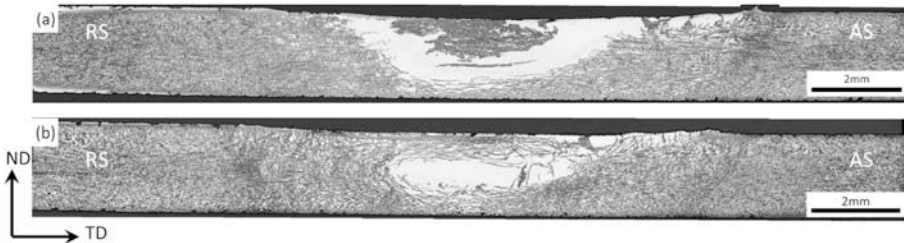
Optical microscope images of a cross section perpendicular to the welding direction for each sample welded at the tool rotation speeds of 200 rpm (a) and 400 rpm (b) and at a welding speed of 400 mm/min.
